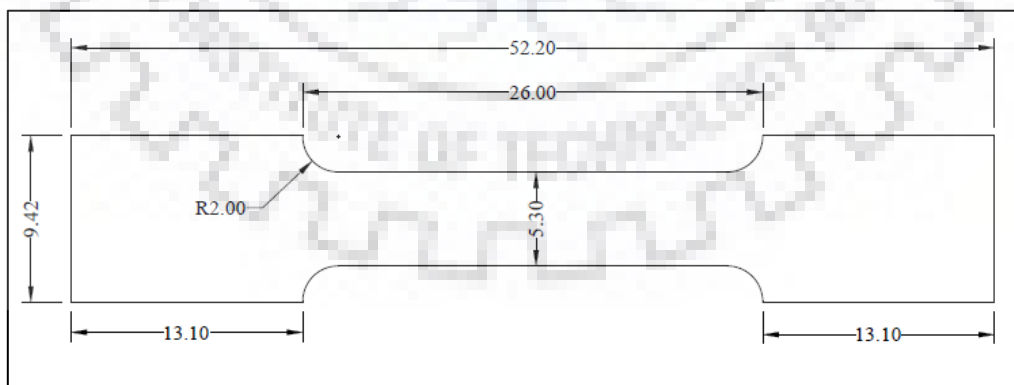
Design of tensile specimen as per DIN 50125 (All dimensions in mm)
